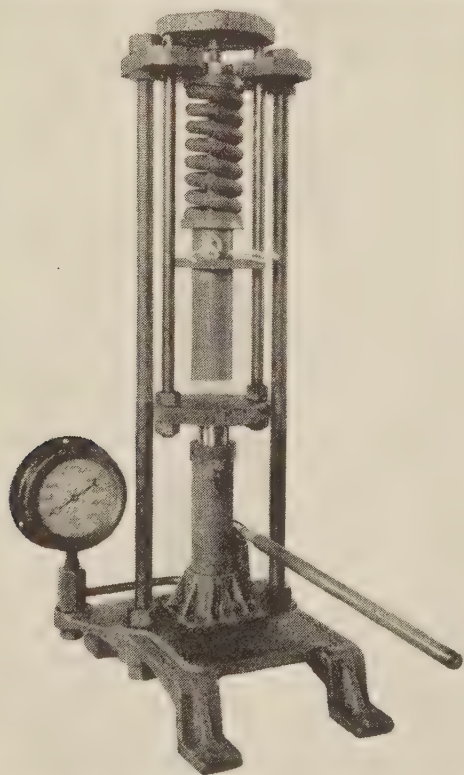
HYDRAULIC PRESS USED FOR COMPRESSING SPRING
